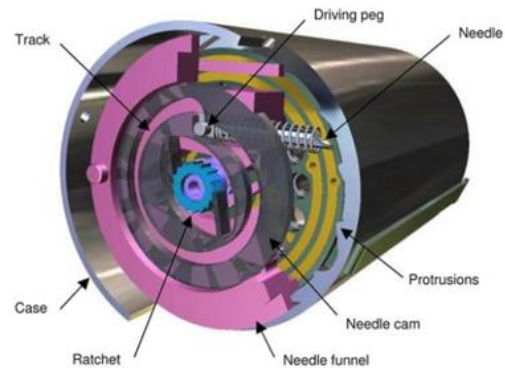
Needle positioning mechanism assembly with material removed for clarity. Needle shown in the fully retracted position.
